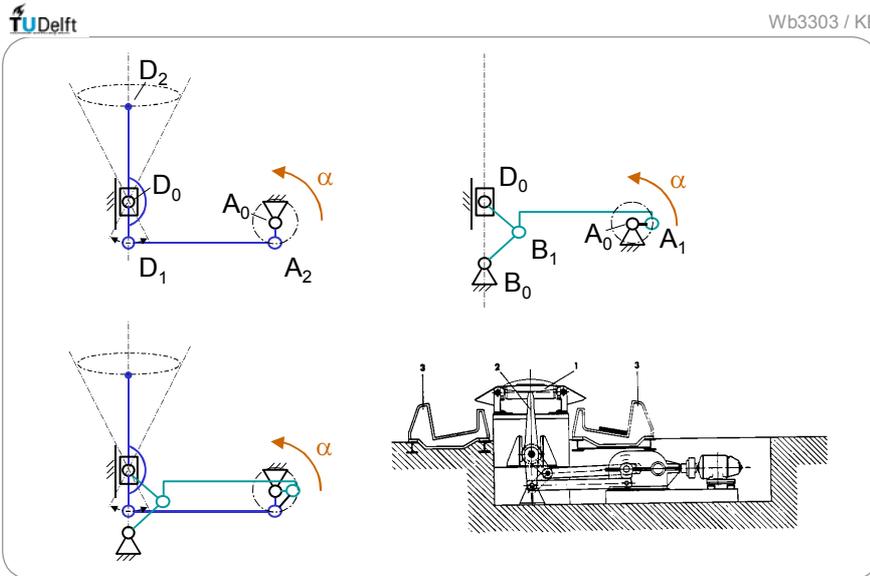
Strip stacker mechanism, kinematic scheme
